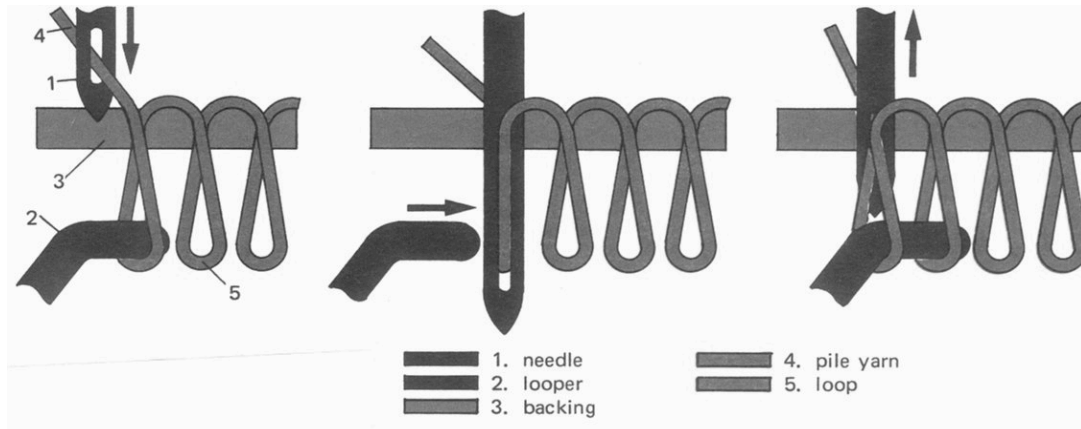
Tufting machine mechanism. Source: Cobble Blackburn Ltd.
